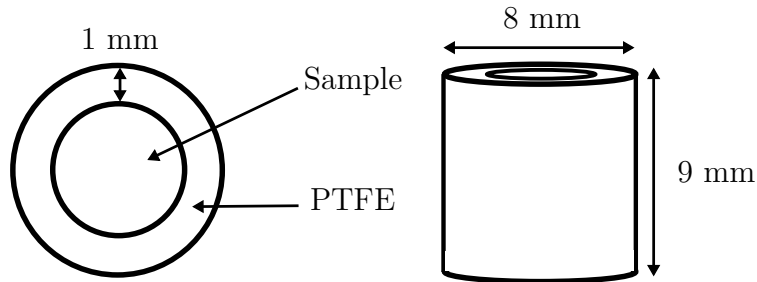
Top and front view of the unshielded PTFE sample container.
